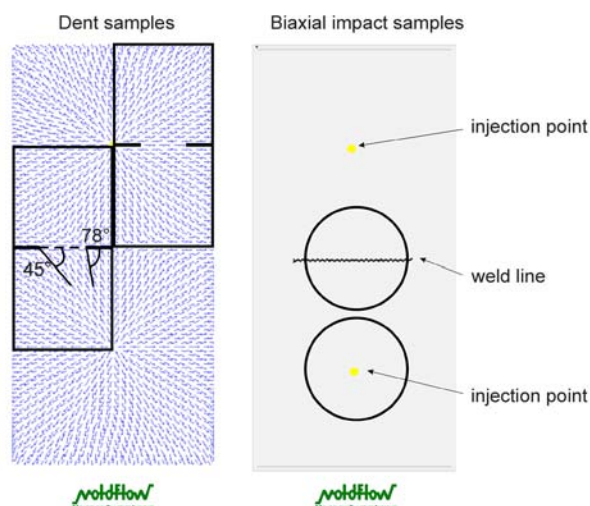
Location of samples cut from moldings for mechanical tests. Weld line location and flow direction in the skin were assessed using Moldflow®.
